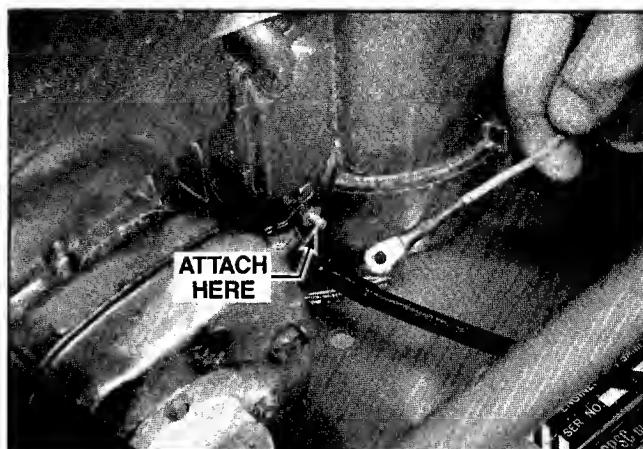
Attach ignition ground wire on 22" (5HP engine) mower.
